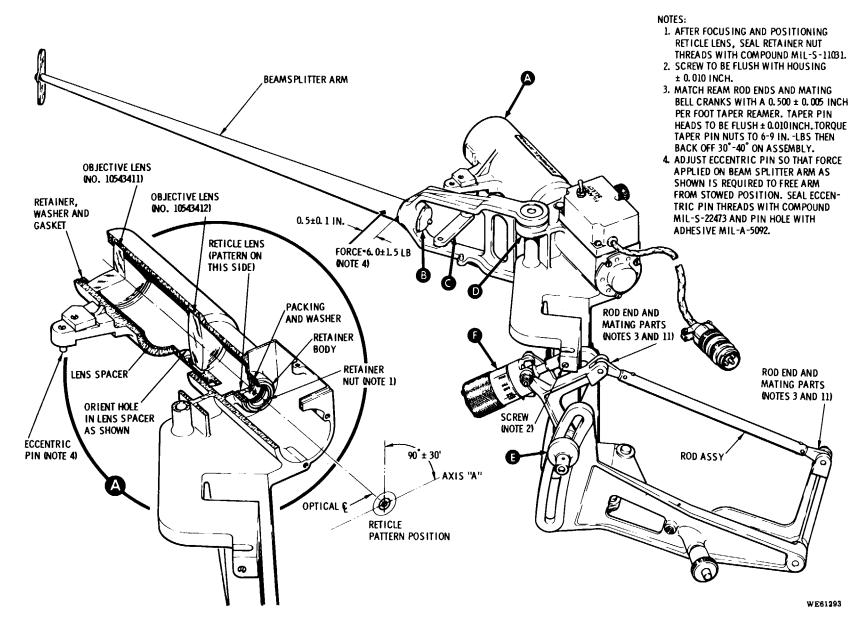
(1). Sight assembly adjustments (sheet 1 of 2).
